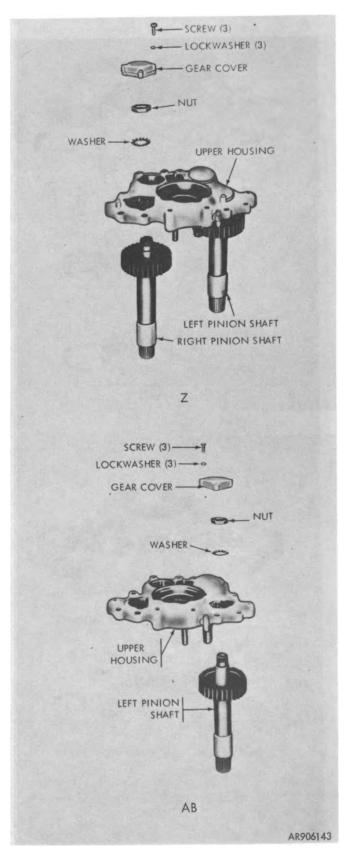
Traversing gearbox disassembly or assembly (10 of 15).
